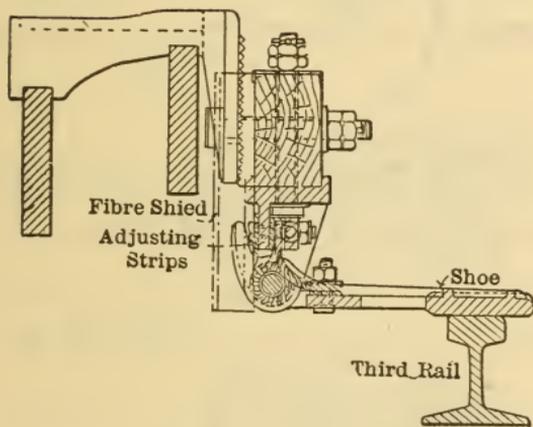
Link Shoe, used on Manhattan Elevated Railway.
